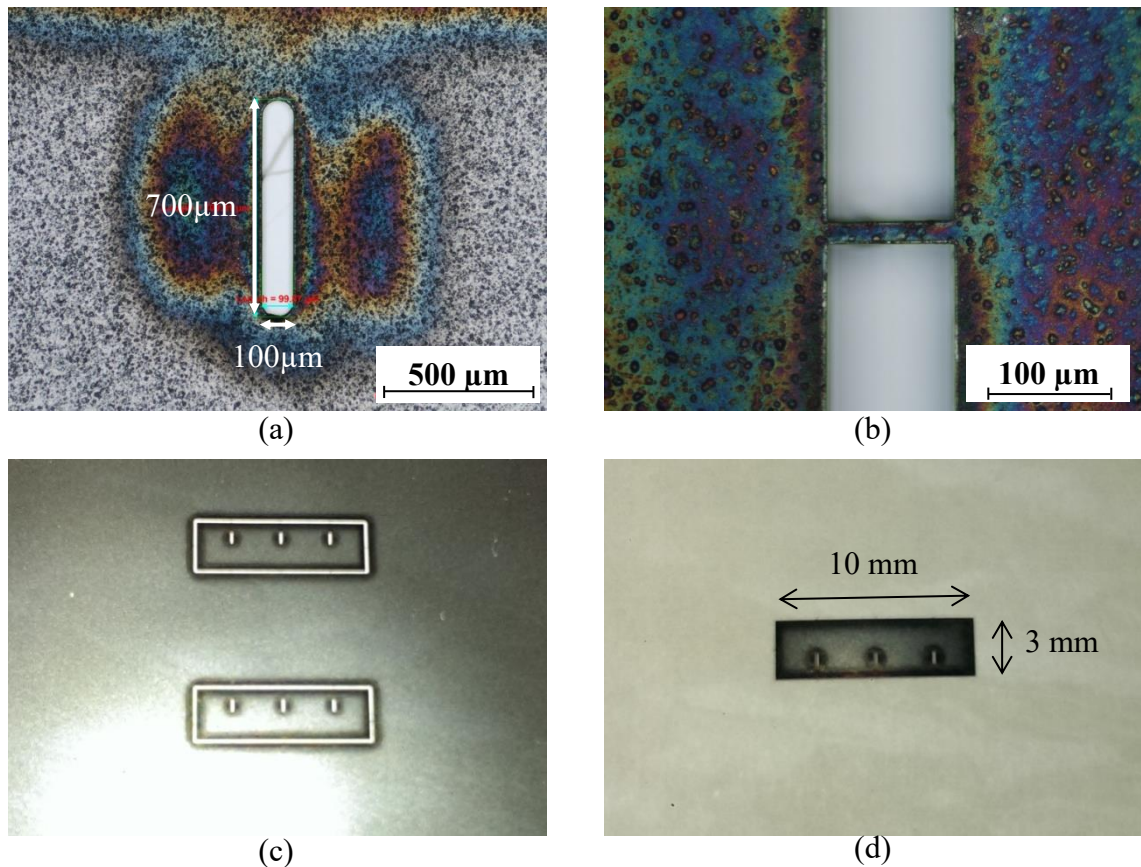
(a) slit machined through black polyimide sheet. (b) Tab to keep panel in sheet after cut out. (c) 2 parts machined in black polyimide sheet, held in place by the tabs in image (b). (d) a part after removal from the sheet after application of a small force to break the 20 μm tabs.
